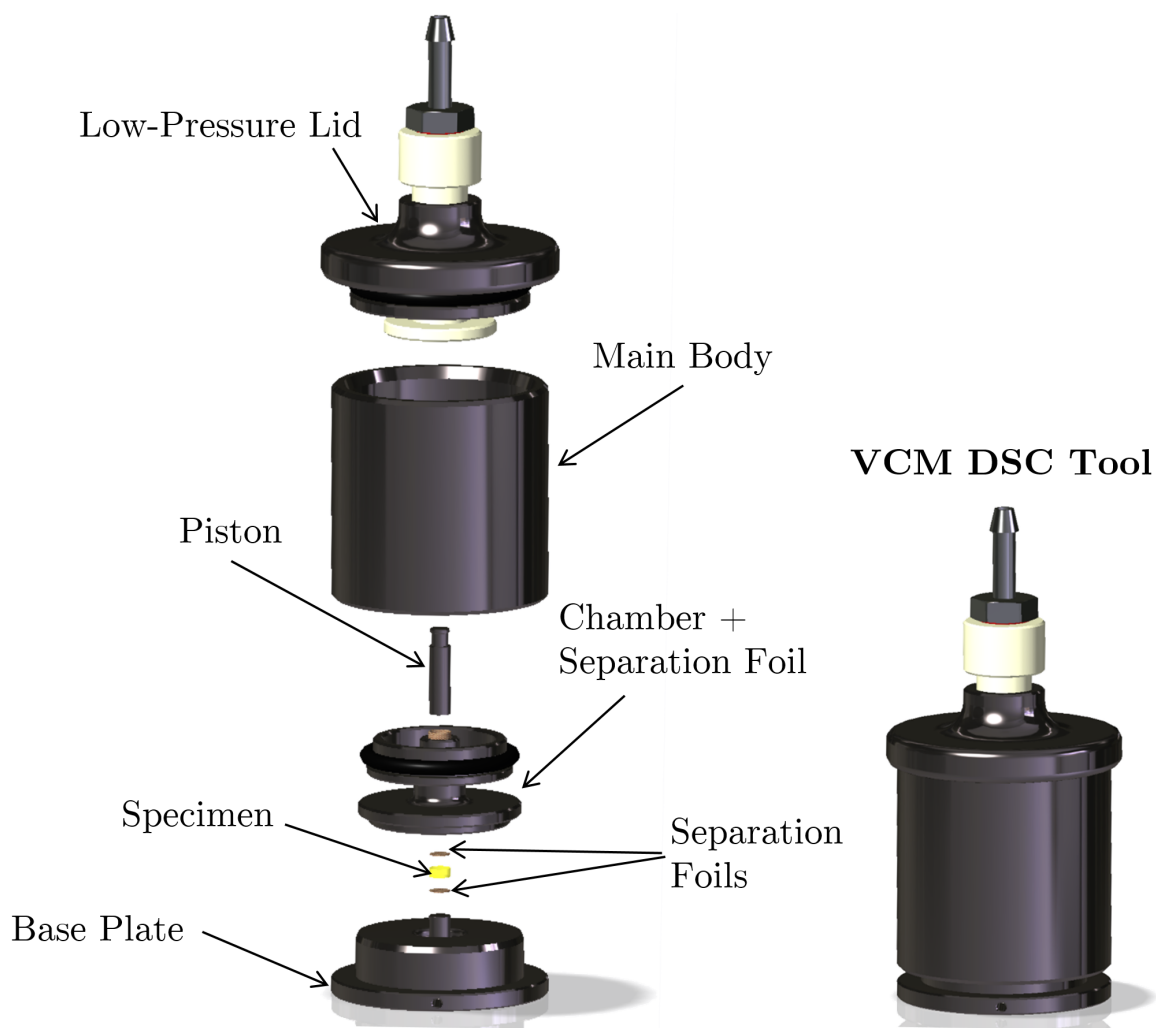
VCM DSC Tool explosion view (left) and assembled (right)
